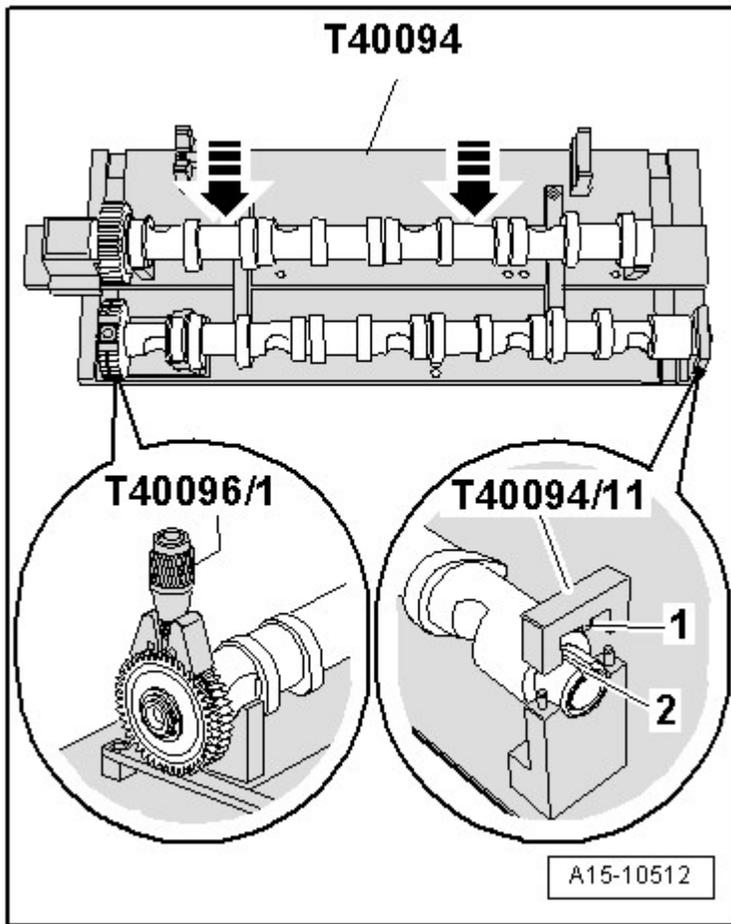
Identifying Exhaust Camshaft Installed And Secured Positions
